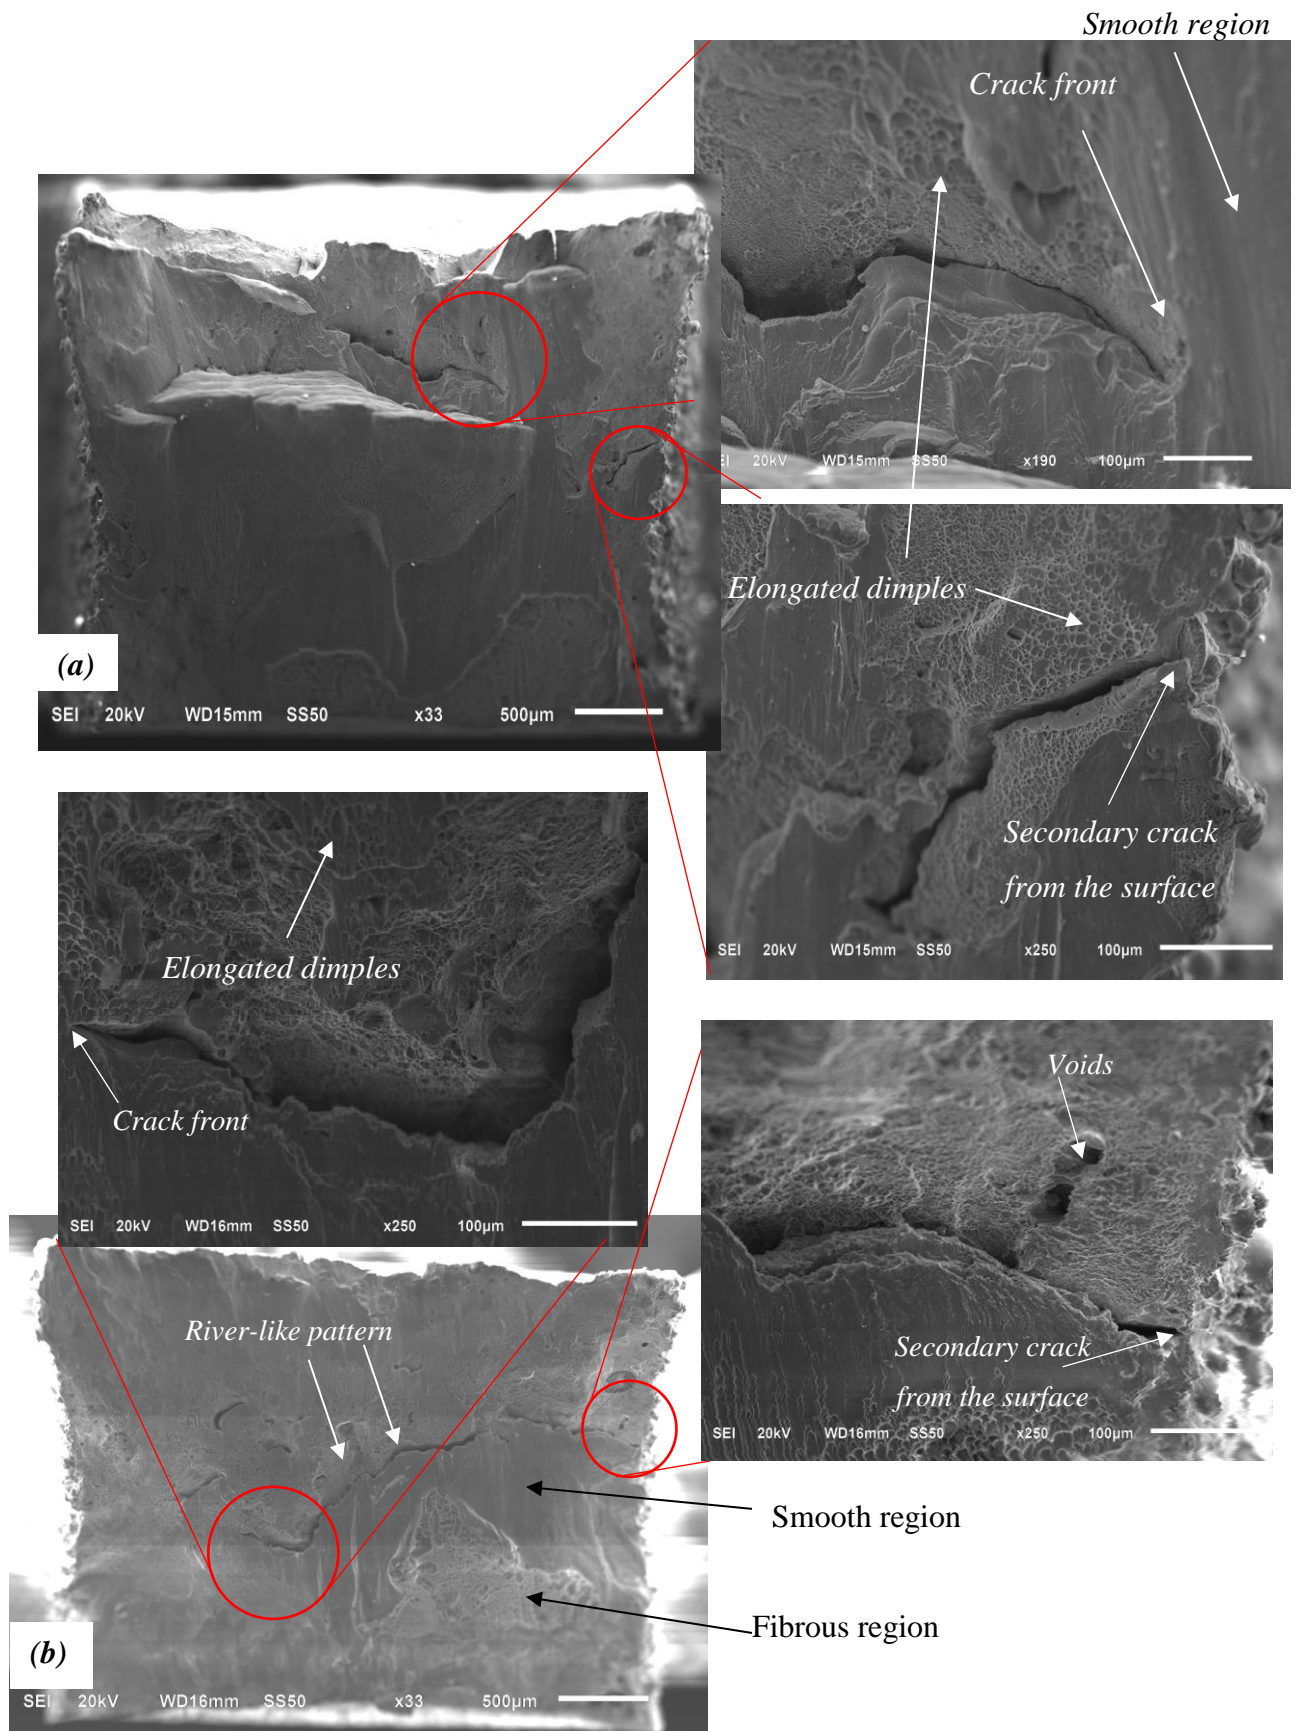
Macroscale views of the typical AB (a) and SR (b) fractured samples.
